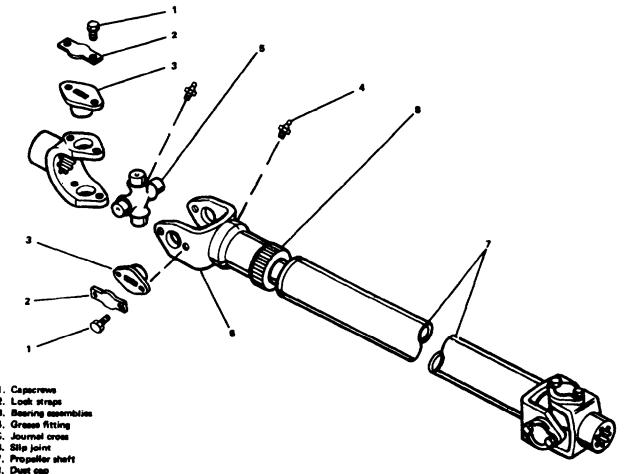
Propeller Shaft (810N37 & 10U49)
